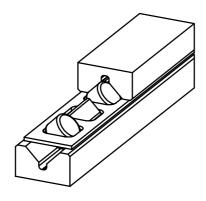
Non-recirculating linear roller bearing, linear guideway, crossed roller type
